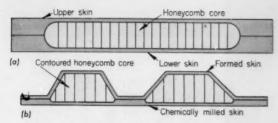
Chemically milled skins, a, and cores, b, for honeycomb assemblies.
